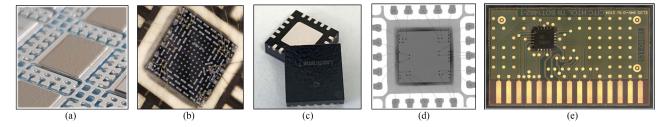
Illustration of the steps involved in the package assembly process. (a) Micro-Ag sinter material screen printed on a lead frame. (b) Sintering of a test chip onto the lead frame with wire bonding. (c) Molded, singulated, and laser marked PQFN packages. (d) X-ray inspection of a molded package. (e) PQFN soldered to a test board for online measurements.
